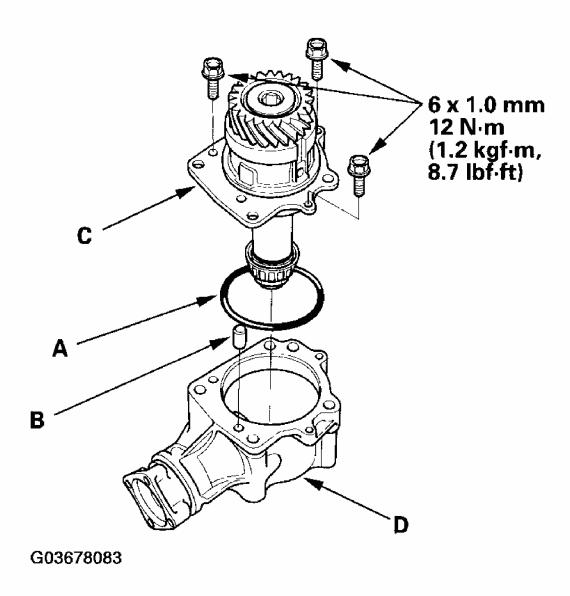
Coating New O-Ring With MTF, Install On Transfer Holder, Dowel Pin And Transfer Holder Assembly In Transfer Housing With Specified Torques Courtesy of AMERICAN HONDA MOTOR CO., INC.
